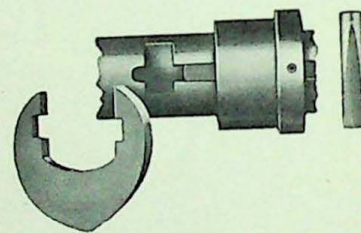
Sectional view shows the sliding cam-carrier on shaft with cam and lock-pin removed.
